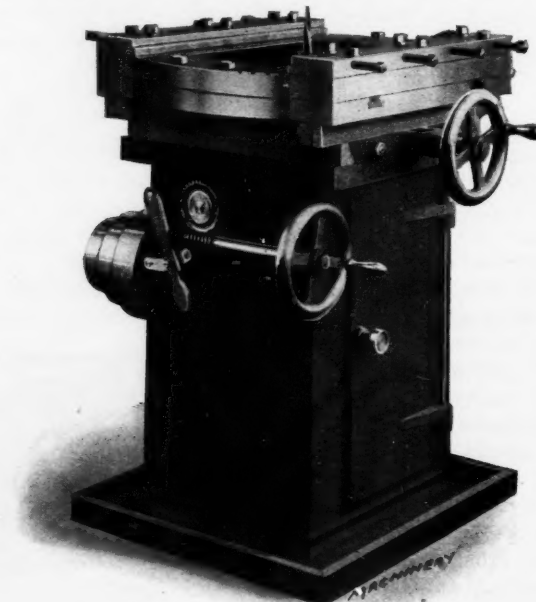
Harrington "Under" Type of Milling Machine for Die Work
